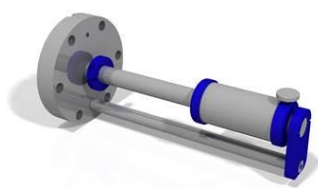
Feedthrough with single sided tube support MD40(Y0)-TSMDH
